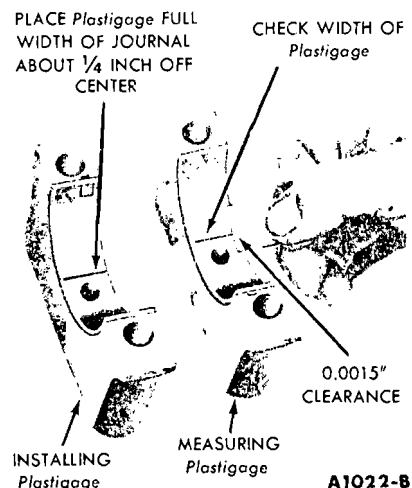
Installing and Measuring Plastigage—Engine Installed
